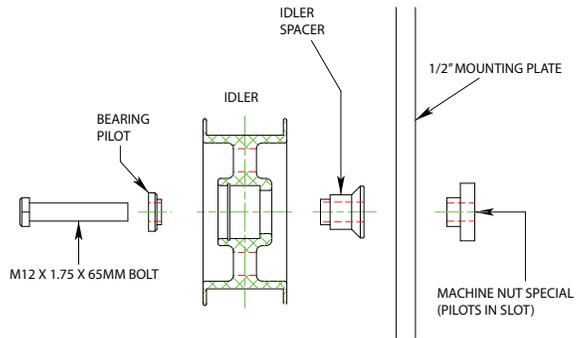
c (Cog Belt Tensioner Assembly - Side View)
